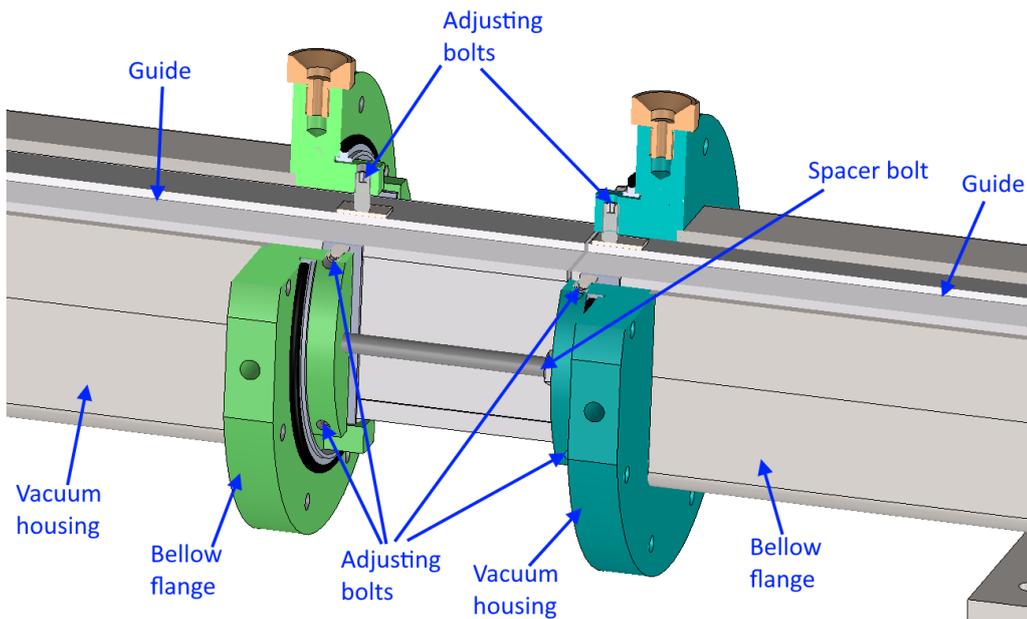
Partial section view showing the bellow flanges with the bellow removed. NOTE that the bellow must not be removed during guide adjusting, it just manually pressed to one of the flanges
